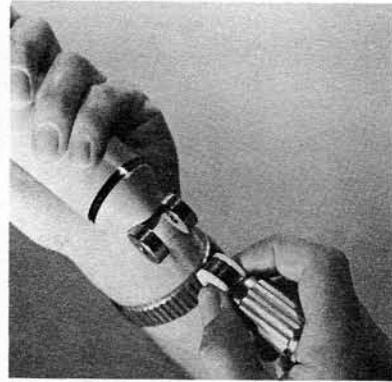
The swivel and the two Teflon washers may now be removed to reveal the tapered base section.
